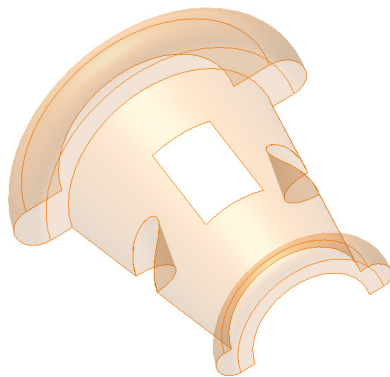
Model after deleting the split surface Figure 18-62 3D Sketch created using edges
